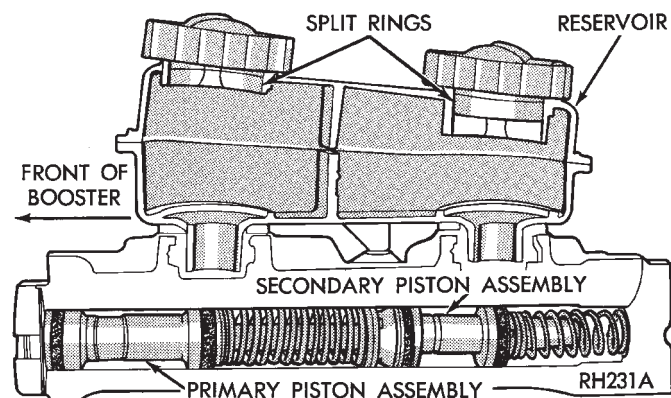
Aluminum Master Cylinder (Cutaway View)
